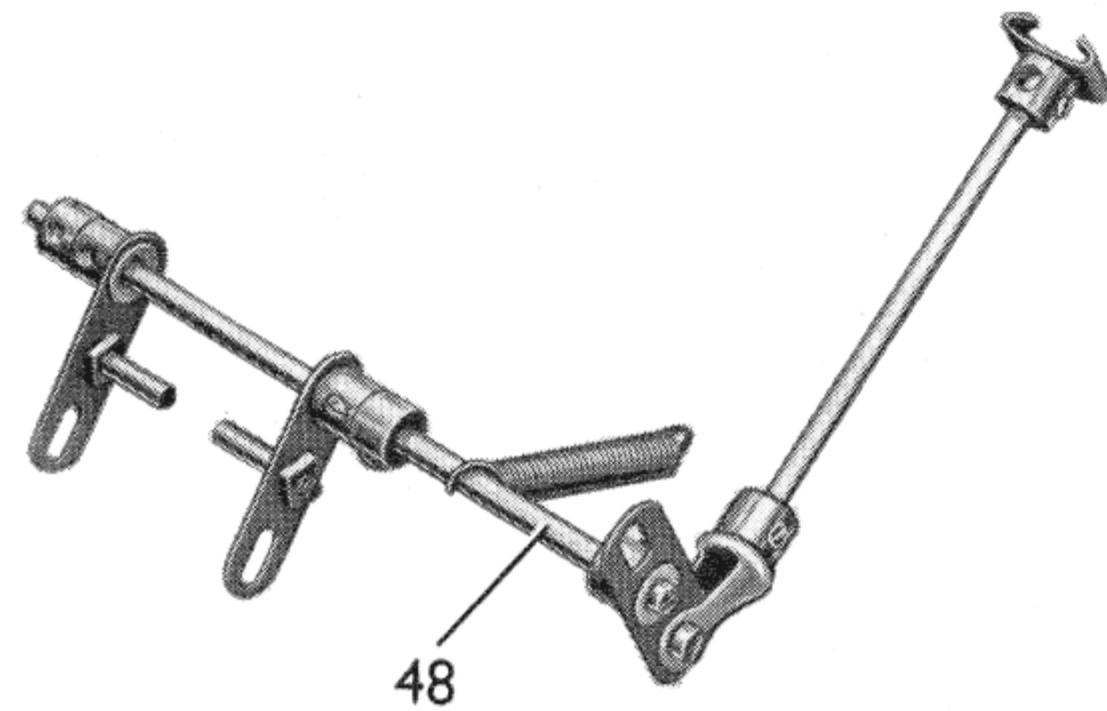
The clutch pedal and release lever unit removed from the chassis
